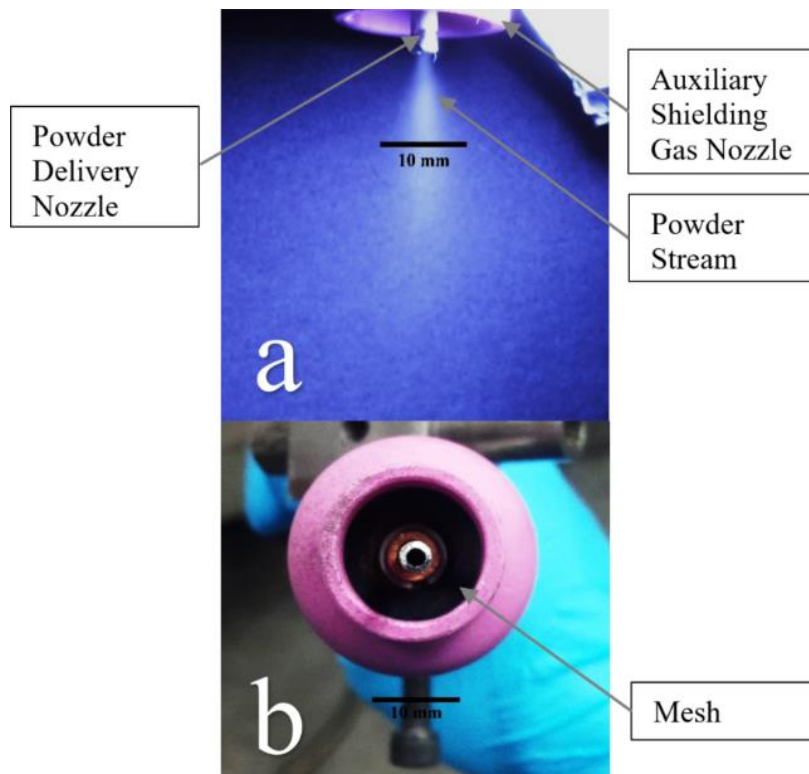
Nozzle discharge; a: Side view; b: Bottom view
